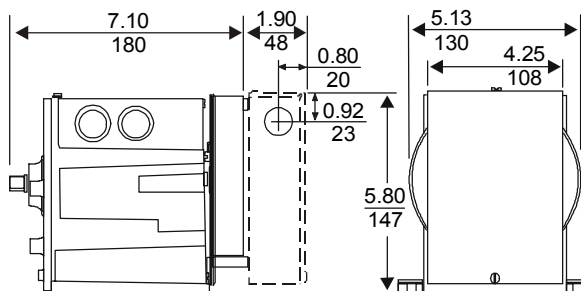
Spring Return with Switch Kit Dimensions, in. (mm)
